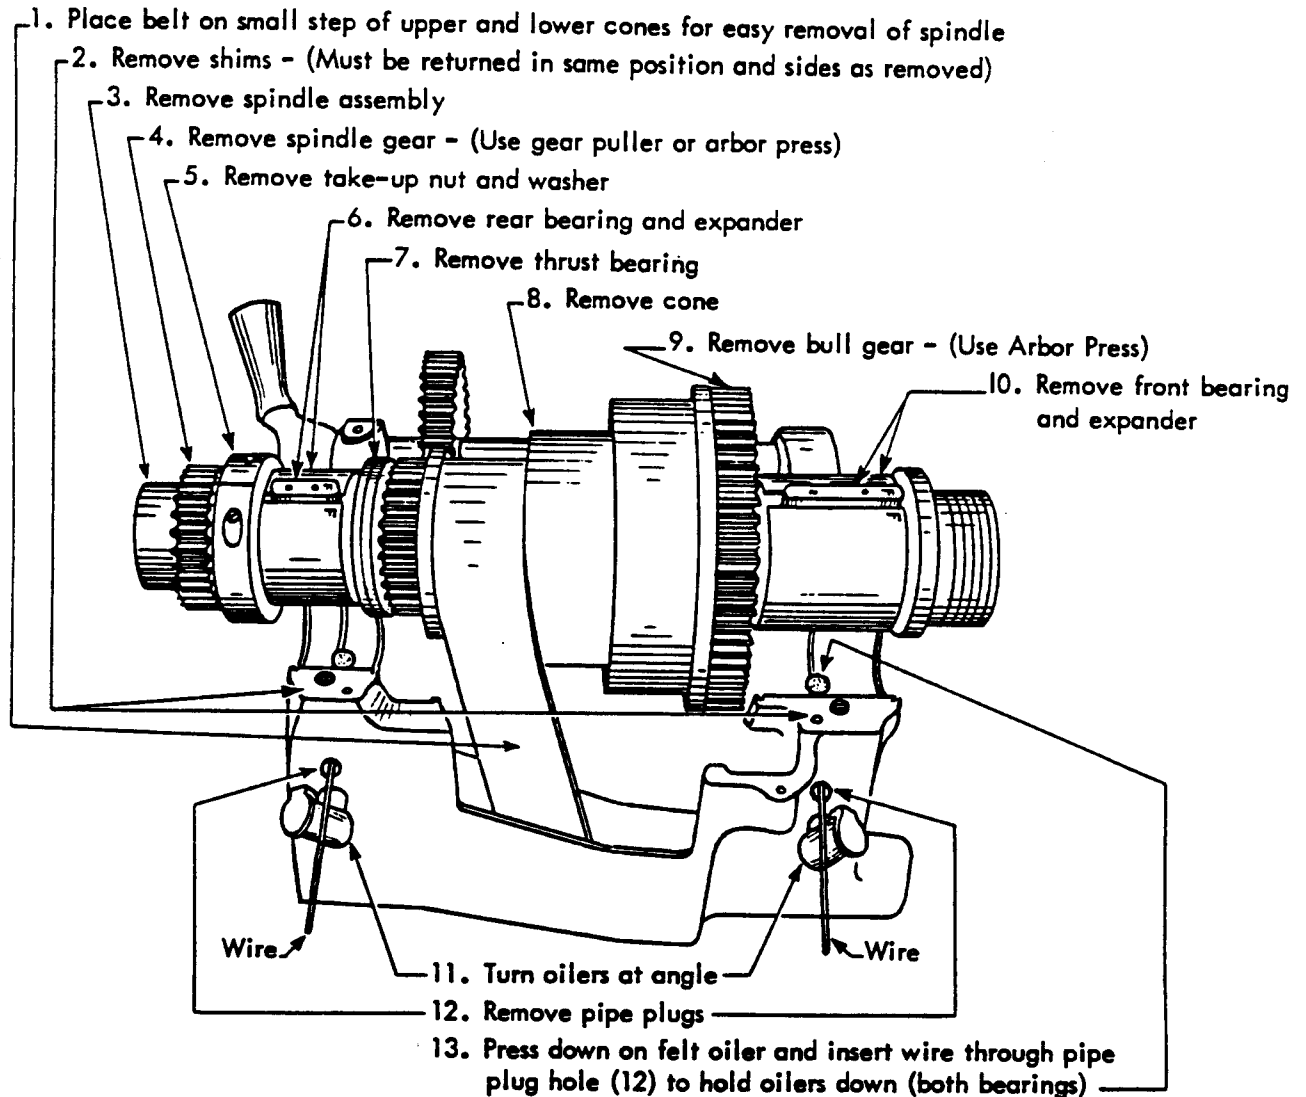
Removing and disassembling spindle. See Fig. 4 if end assembly of spindle differs from above
